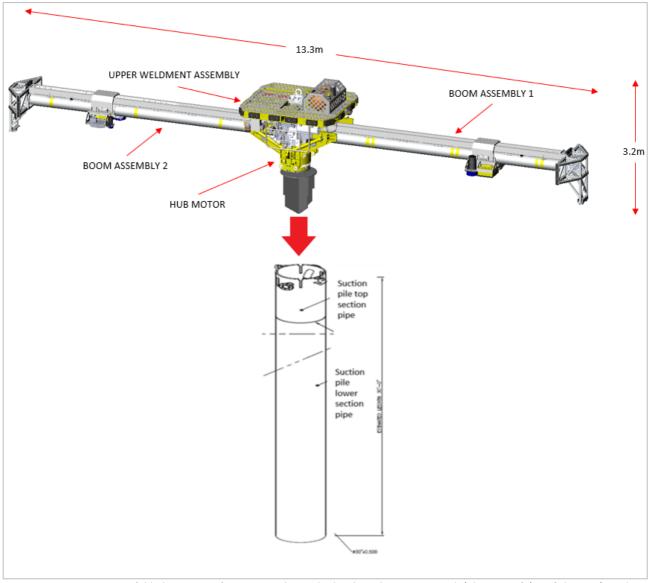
AC in unfolded survey configuration with attached stab guide. Dimensions (L/H) are 43.6ft/10.5ft (13.3m/3.2m). Dimensions are of AC only, not including pile length.
